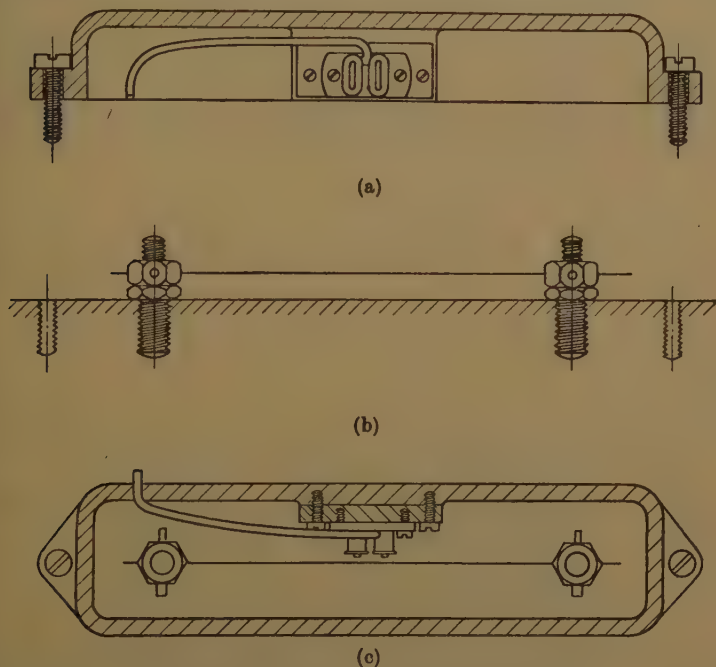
MODIFIED VIBRATING-WIRE GAUGE WITH CAST-IRON COVER FOR USE ON STEEL BEAMS TO BE ENCASED WITH CONCRETE
